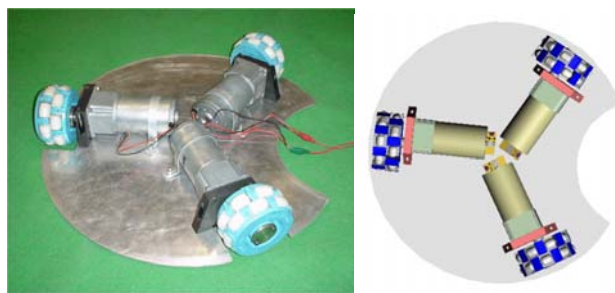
Three-Wheel drive mechanical construction (physical and CAD design)
